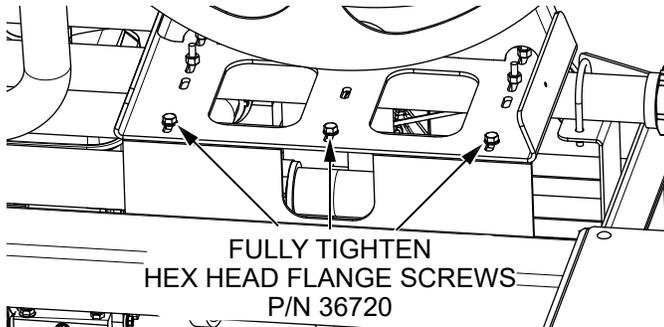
Secure Hose Reel Drum Assembly To Cross Tube
